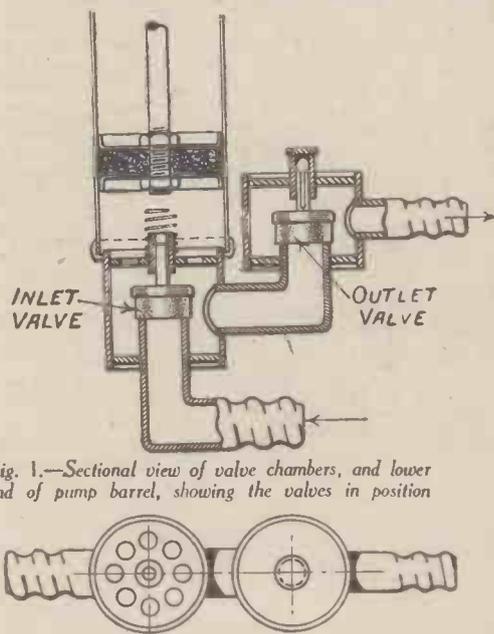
Sectional view of valve chambers, and lower end of pump barrel, showing the valves in position
